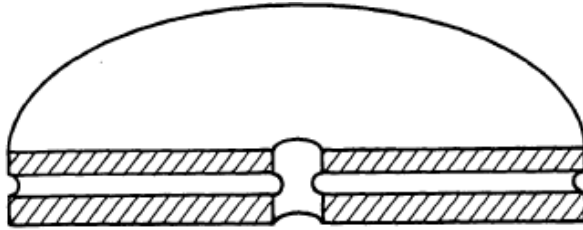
Intersecting Holes Not Accessible with Standard Deburr Tools
